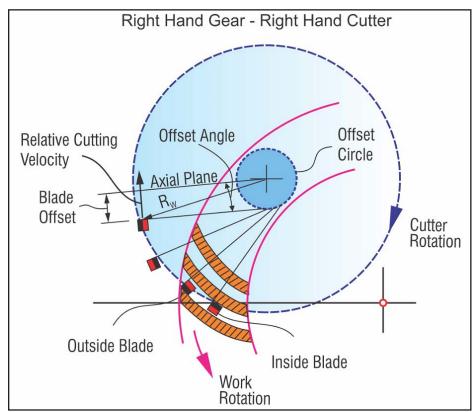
Face hobbing, right-hand gear with right-hand cutter head.
